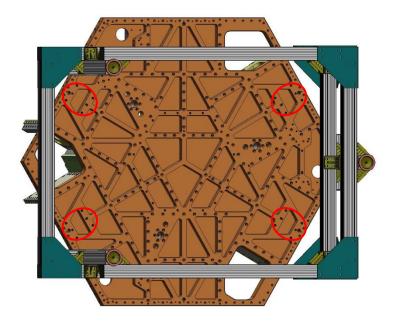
Bottom view of the Stage 1 Assembly, after rotation. Note the location of the (4) sets of Locker Assembly mounting holes.
